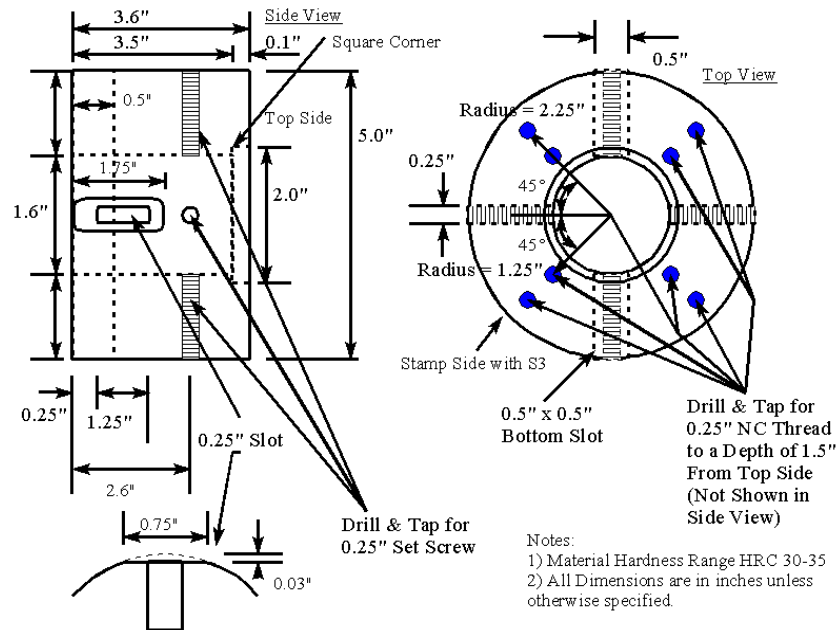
Schematic showing the general dimensional design requirements of the bottom base section of the shear punch test fixture.
